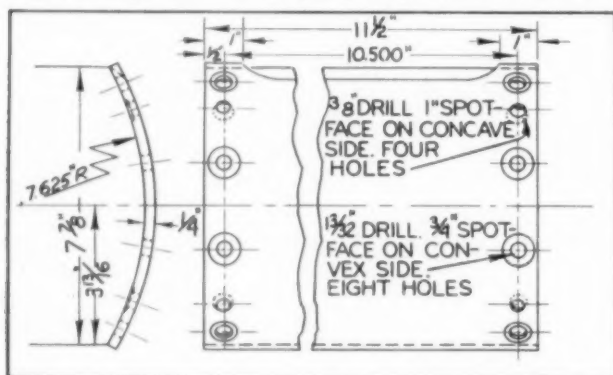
, a controller vane in which eight 13/32 in. holes and four 3/8 in. holes are to be drilled. The holes are spotfaced "free" after removing from the jig.
